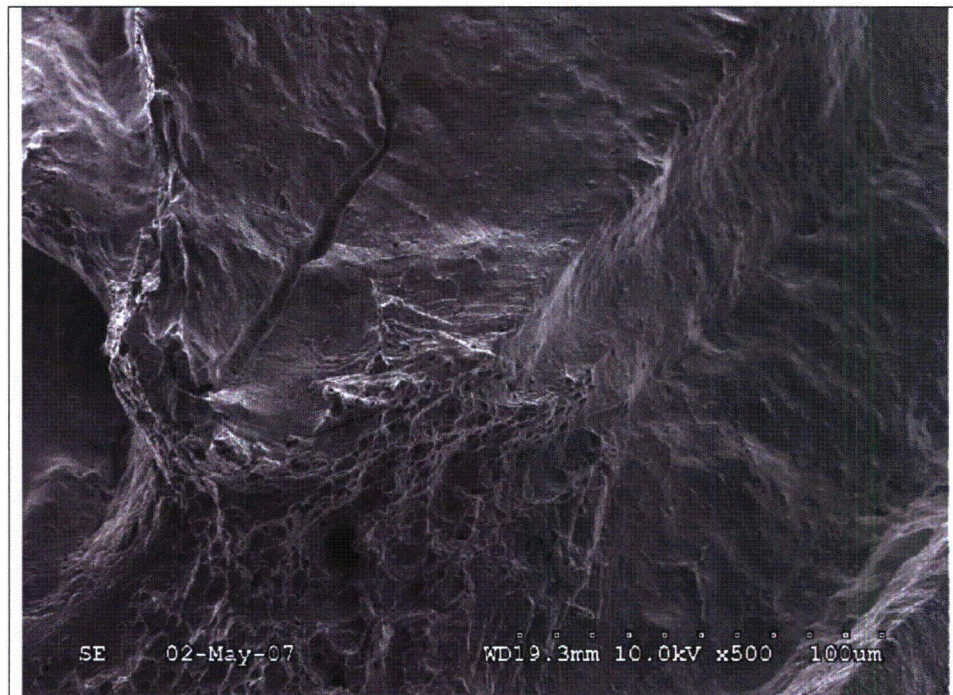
A local patch of ductile dimples on the exposed crack surface in Sample A1. In general, most of the ductile patches were located toward the wetted surface of the weld. (500x Magnification)
